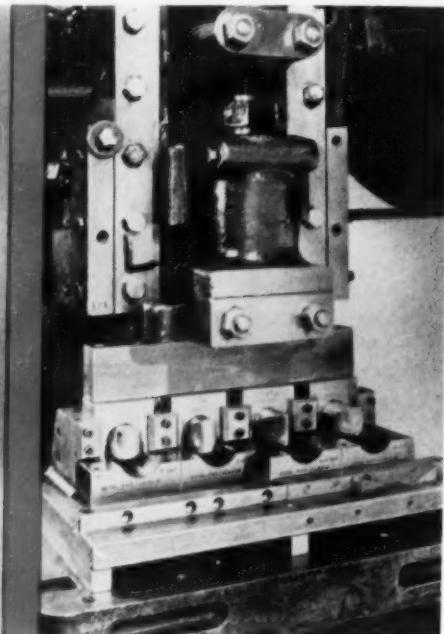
Notching dies for power press operation. This setup produces a complicated tube-end in five consecutive press strokes.
